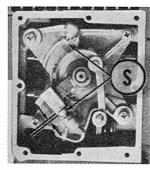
Gear change stop bolts (S) should have approximately 1MM clearance when stop ball engages detent in shifter
